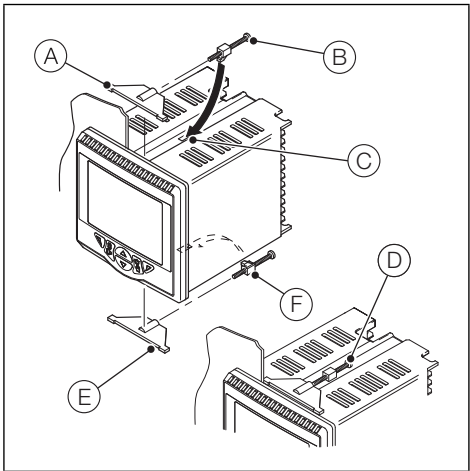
Mounting Details – CM30 / CM50 Controllers
